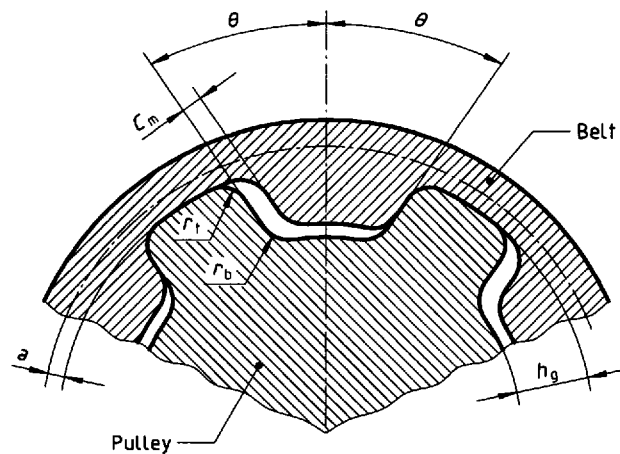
Dimensions and clearance between measuring pulley and belt for types ZA and ZB (see table 8)
